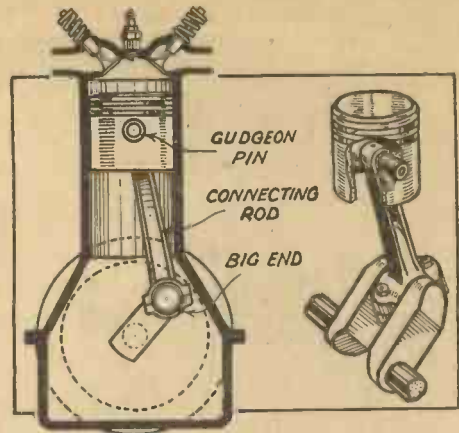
Connecting rod and crank assembly of an automobile engine.
